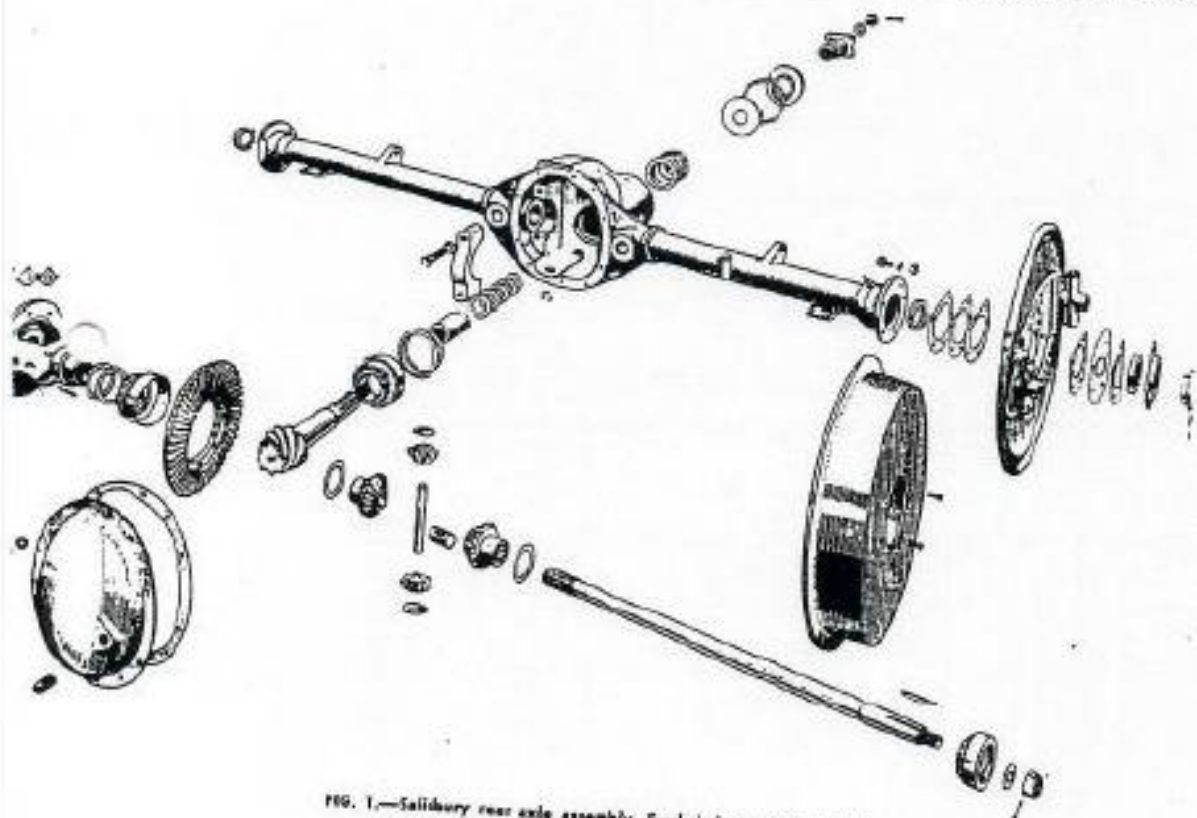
Salisbury rear axle assembly. Exploded view. (Mark VII)
